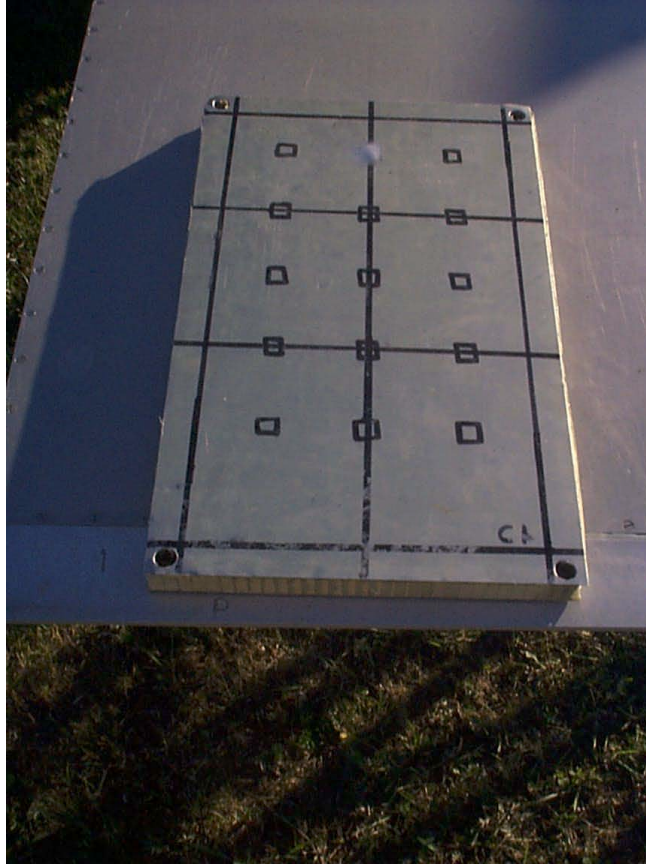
TEST PLATE – ALUMINUM ON HONEYCOMB BACKING
